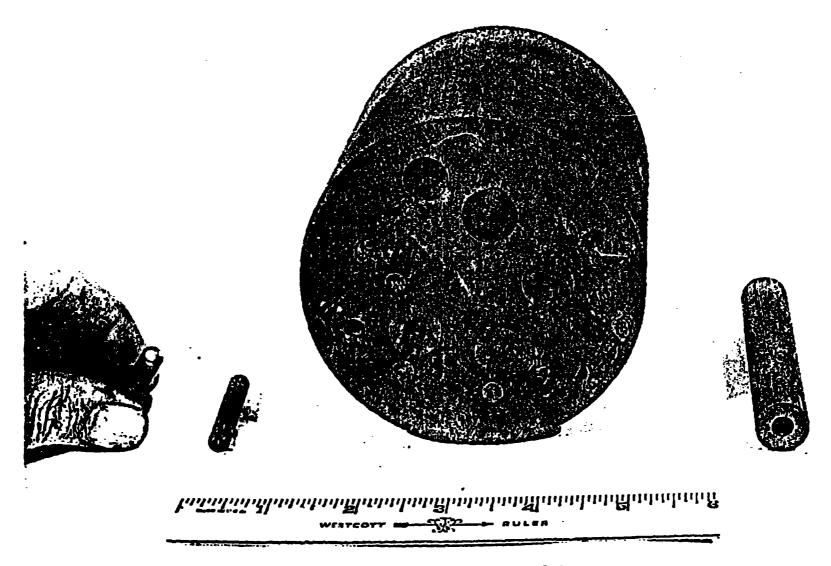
Die Assembly and Hot Pressed Carbide Fuel Pins.
